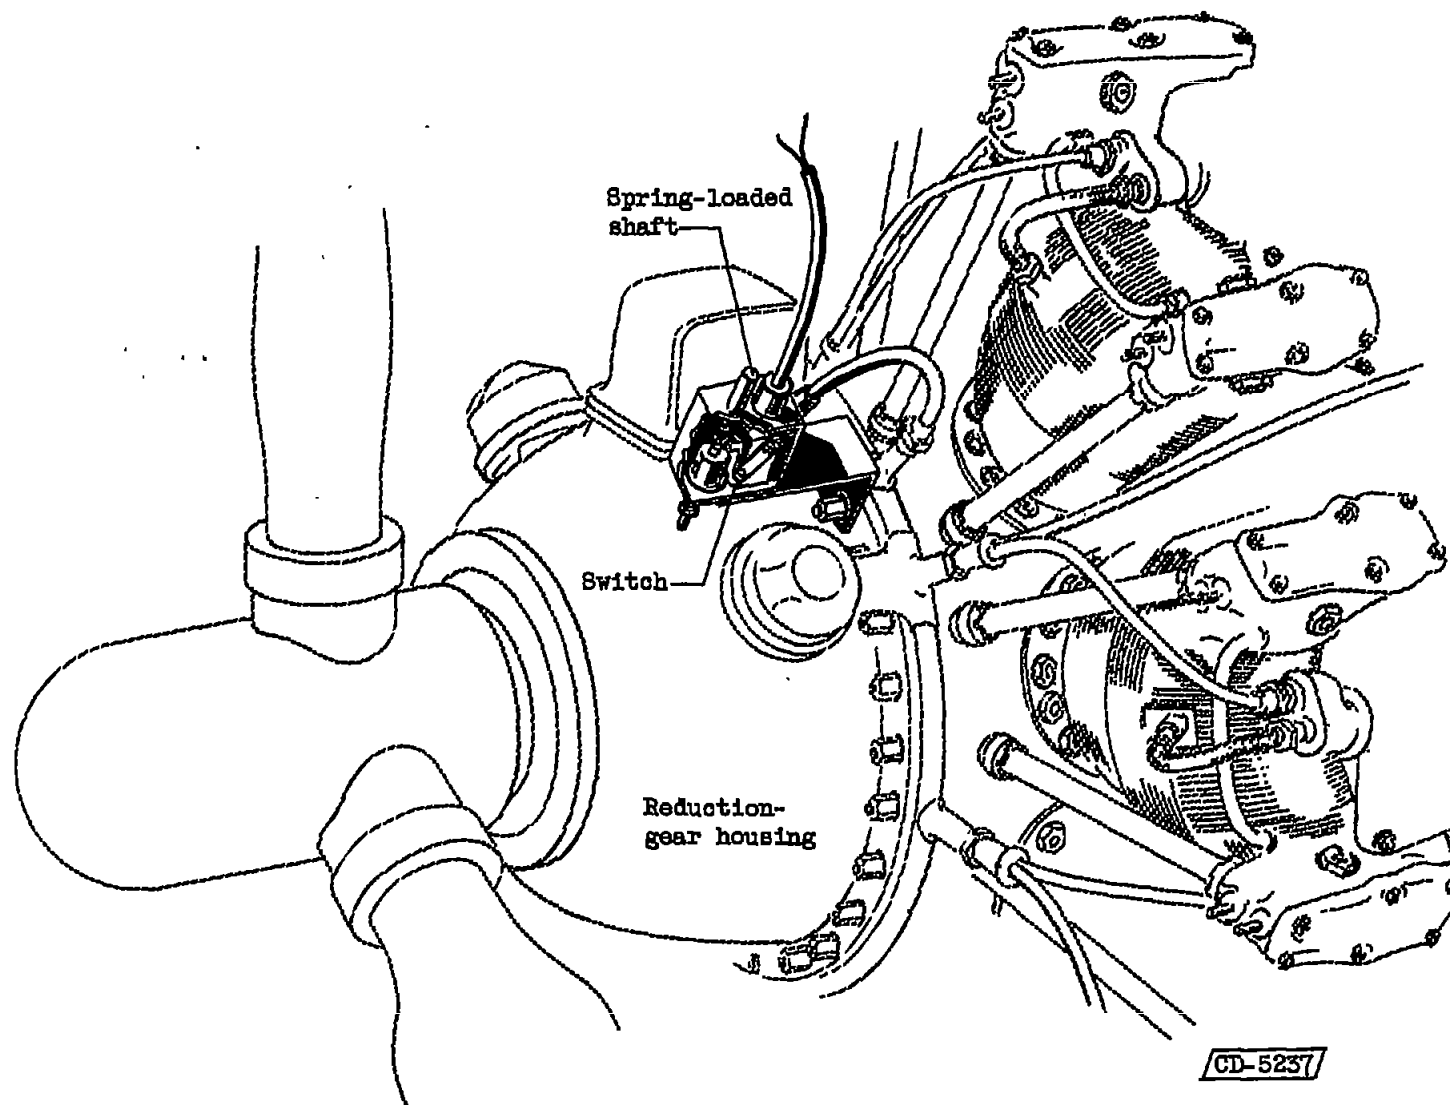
Switch installed on reduction-gear housing to detect breaking away of nose section from engine power section.
